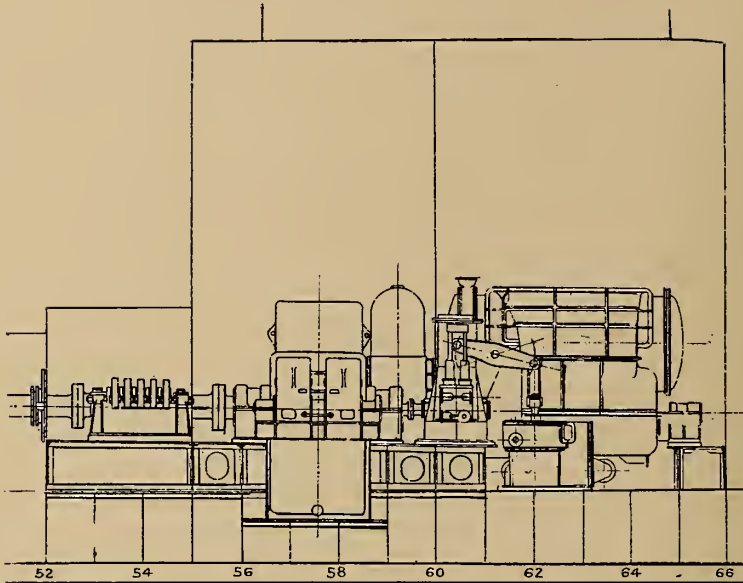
LONGITUDINAL VIEW OF TURBINE ENGINES AND GEARING ON THE VESPASIAN
